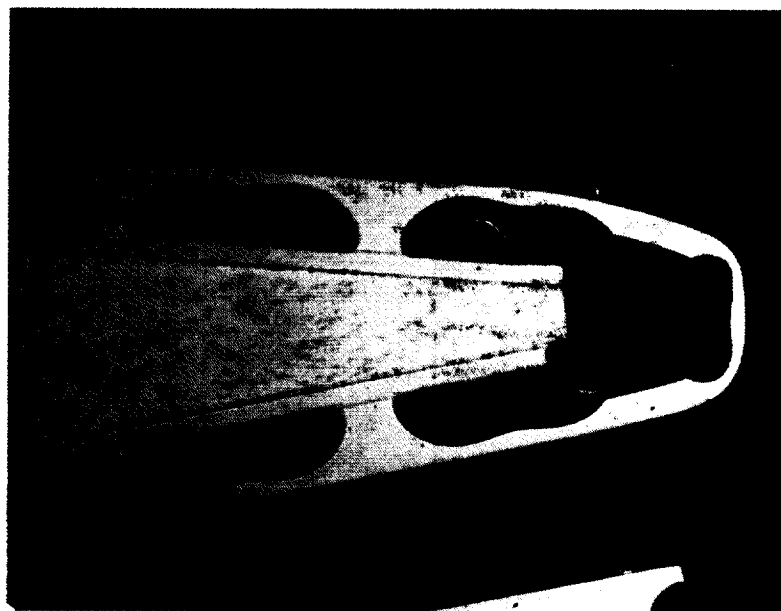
Formed Strut Leading Edge Cooling Jacket Assembly
